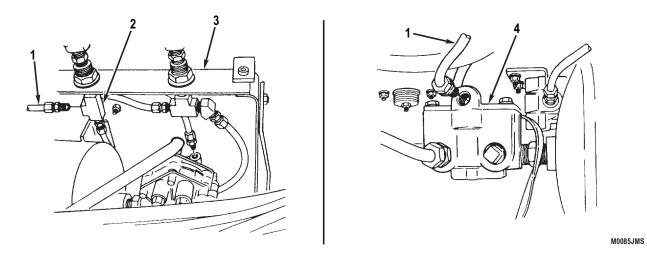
Booster Relay Valve-to-Tee Tube Assembly Replacement.
